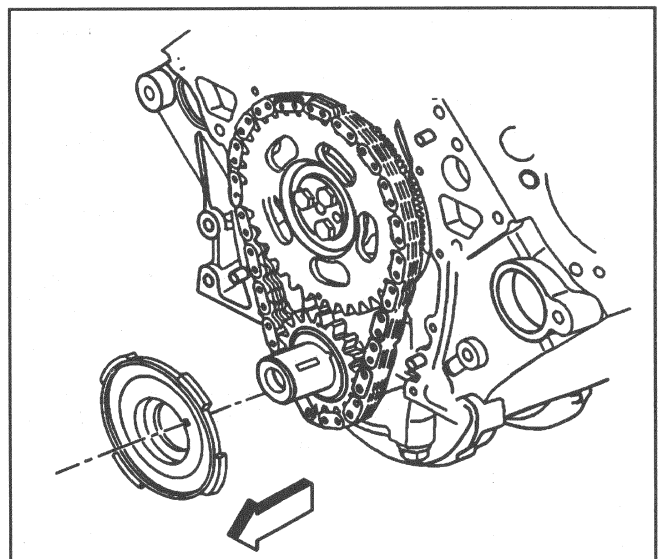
Crankshaft Position Sensor Reluctor Ring
